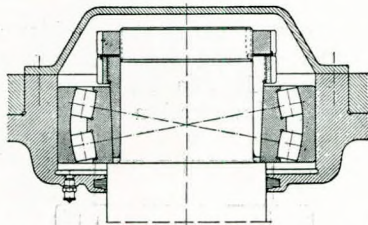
Upper double-row self-aligning bearing for the rudder shown in Fig. 3.
